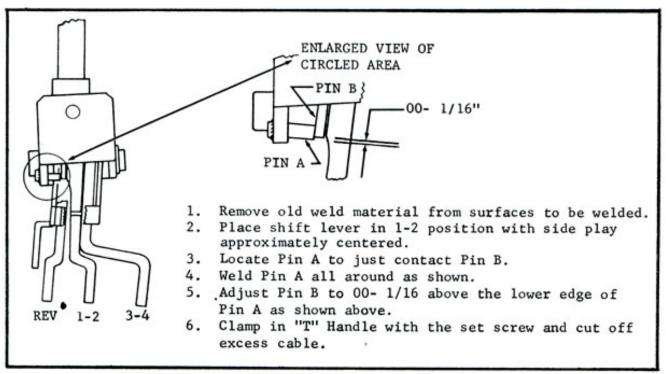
REVERSE BLOCKER PIN LOCATING DETAILS
